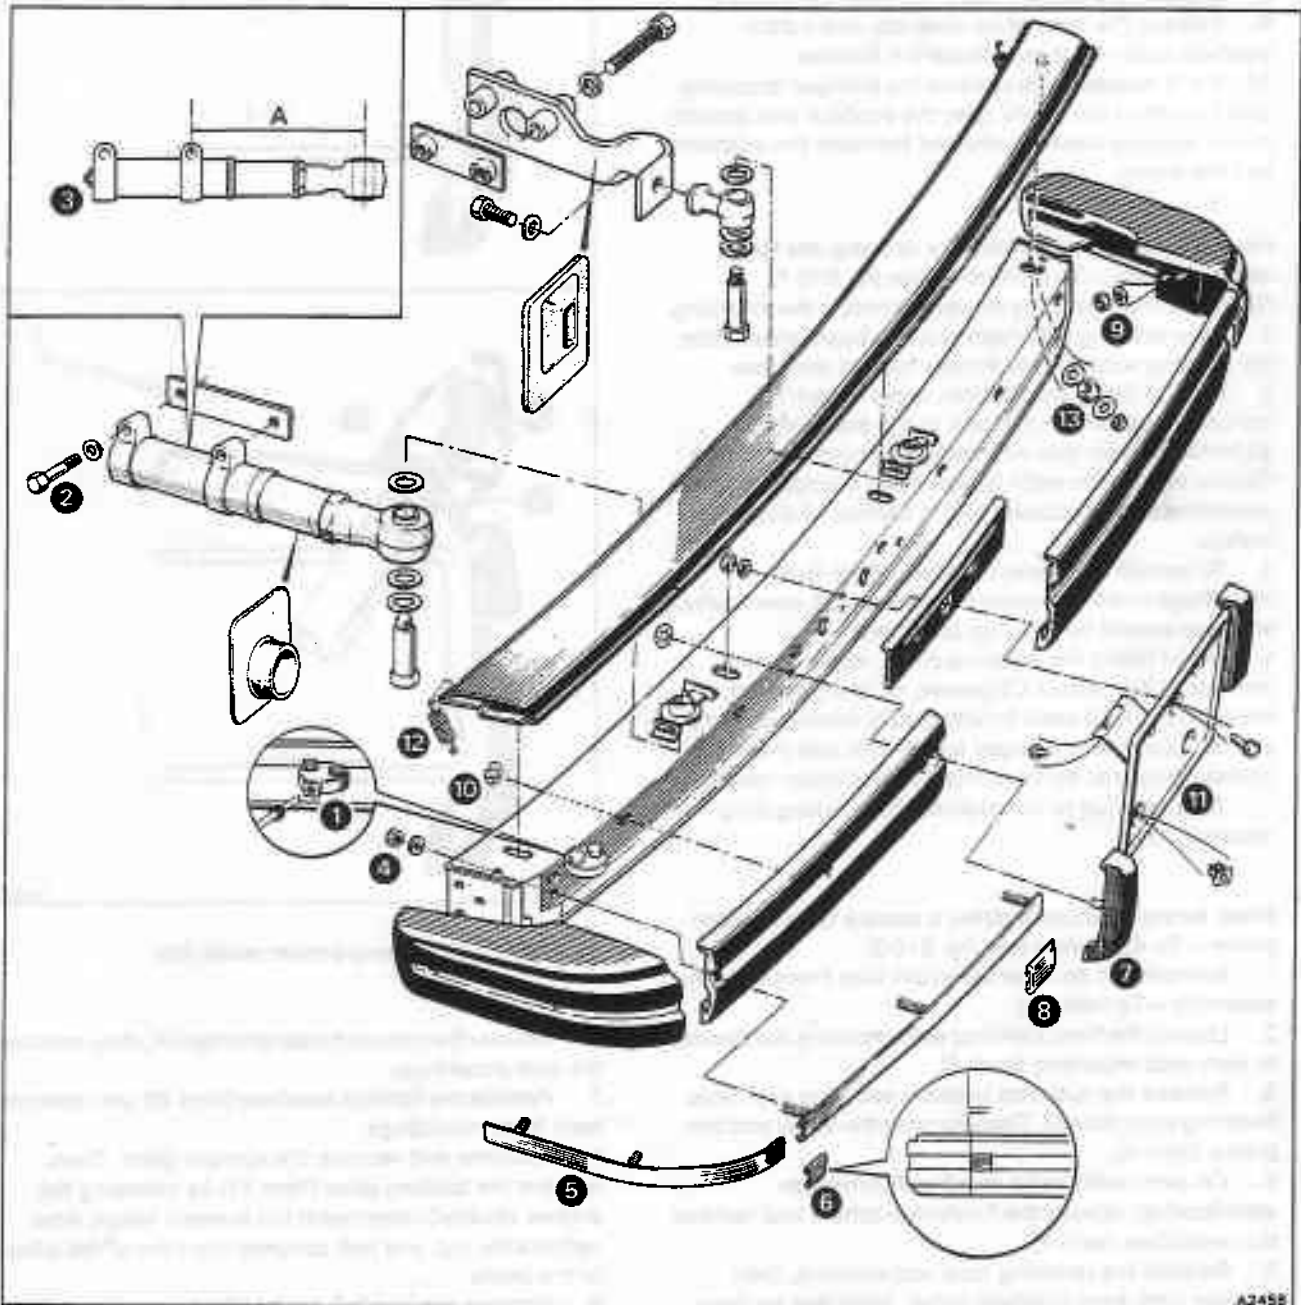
Front bumper assembly (incorporating a square type number plate)
